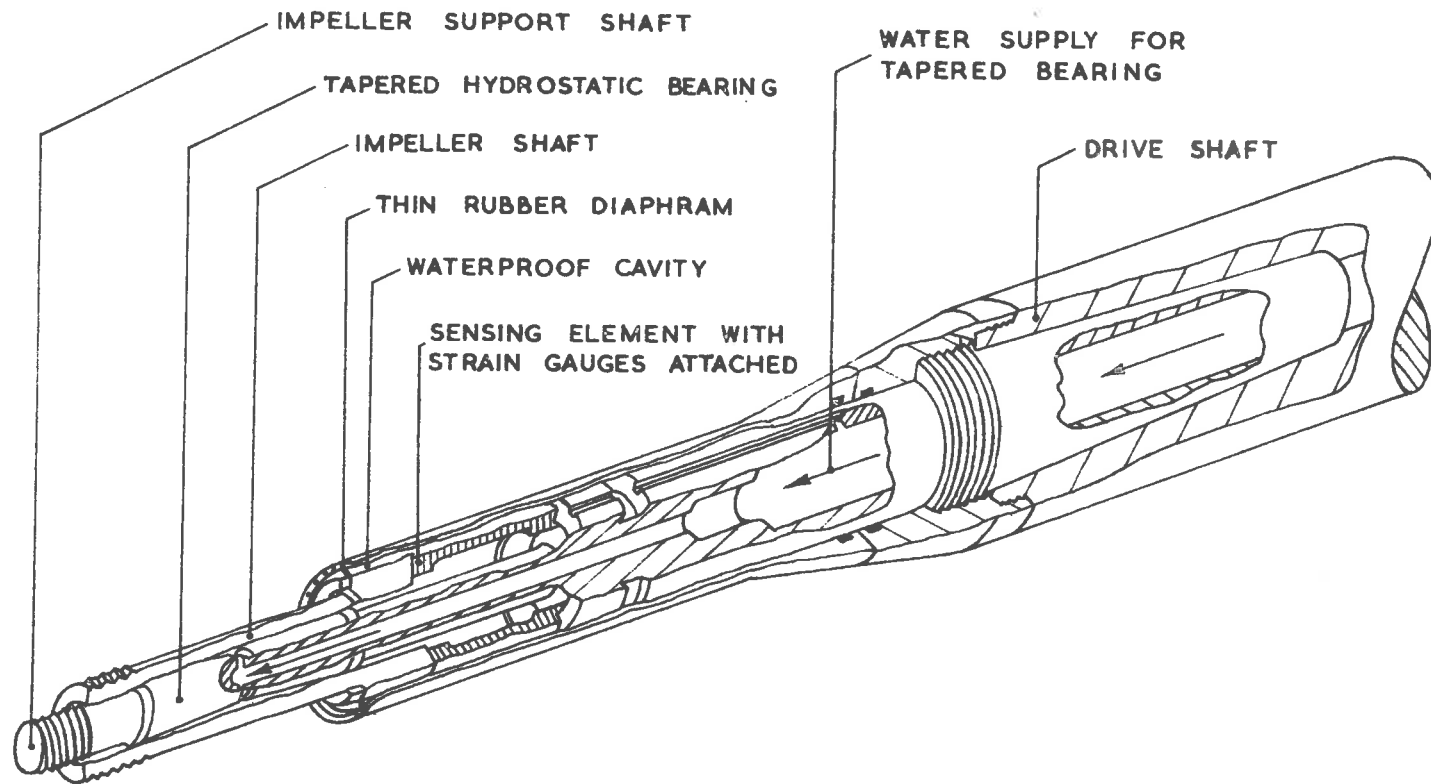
CROSS SECTION OF DYNAMOMETER
